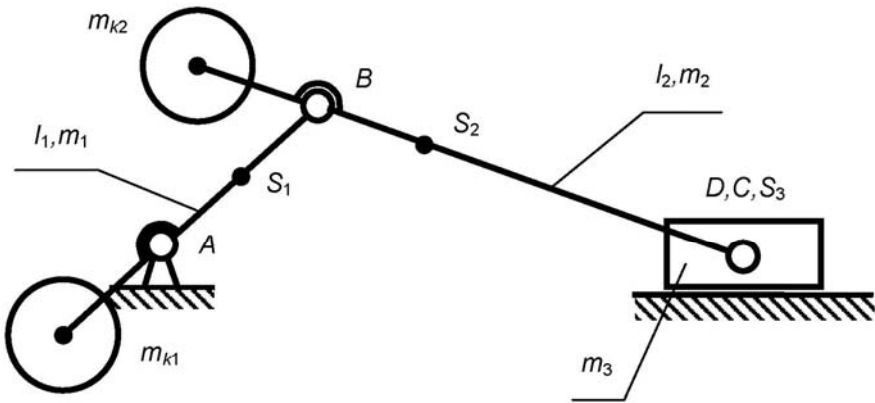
Model of a statically counterbalanced crank-slider mechanism of a piston compressor
